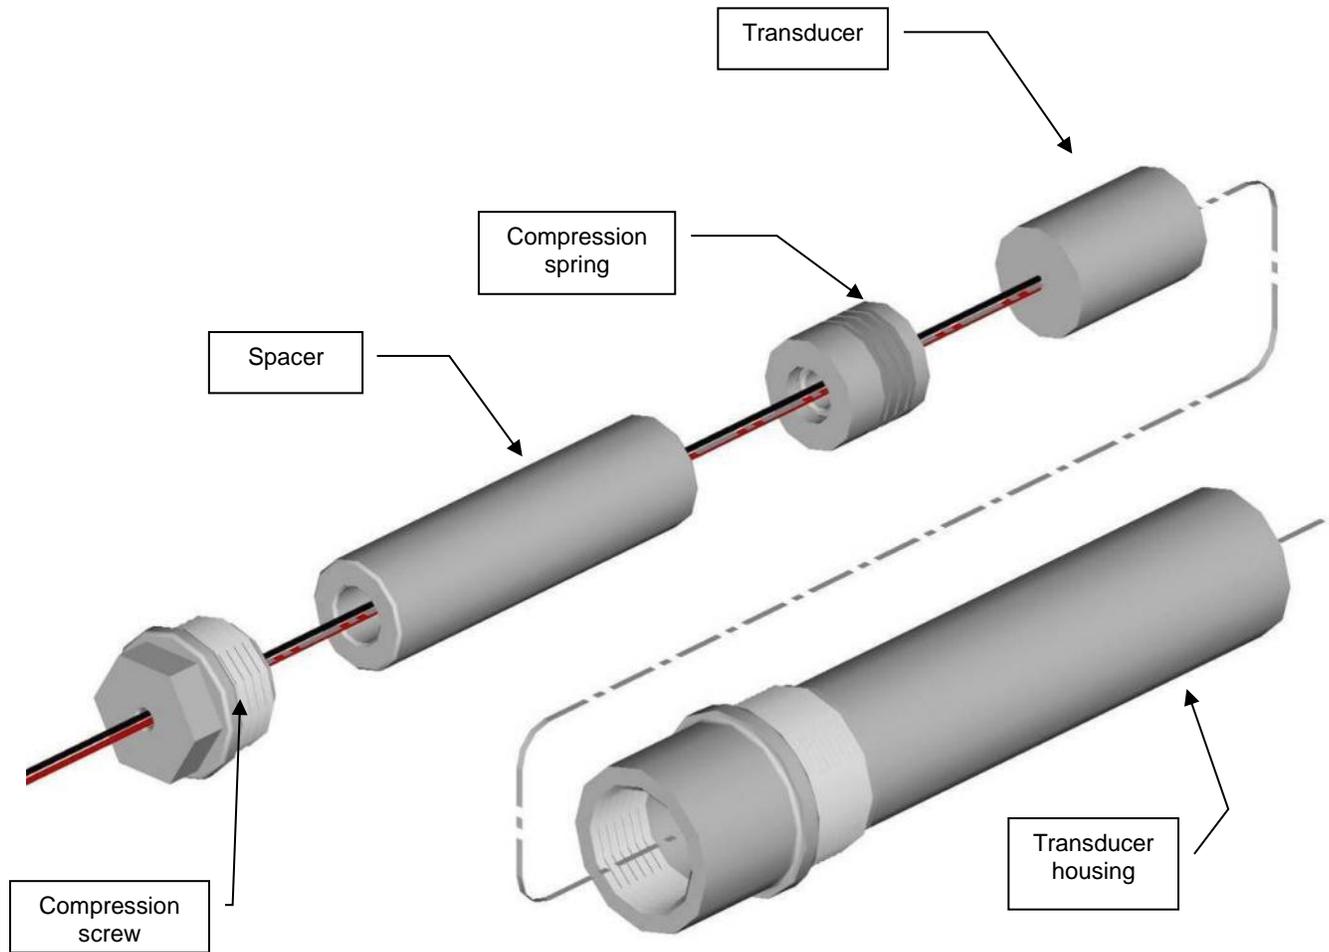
Transducer Assembly Construction (half inch housing shown – for the 1 inch housing – the spring and spacer order is reversed).
